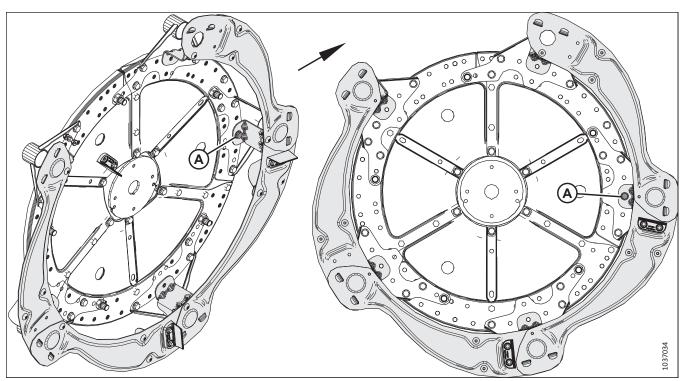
Five-Bat Reel – Partially Assembled Reel Endshields on Reel
